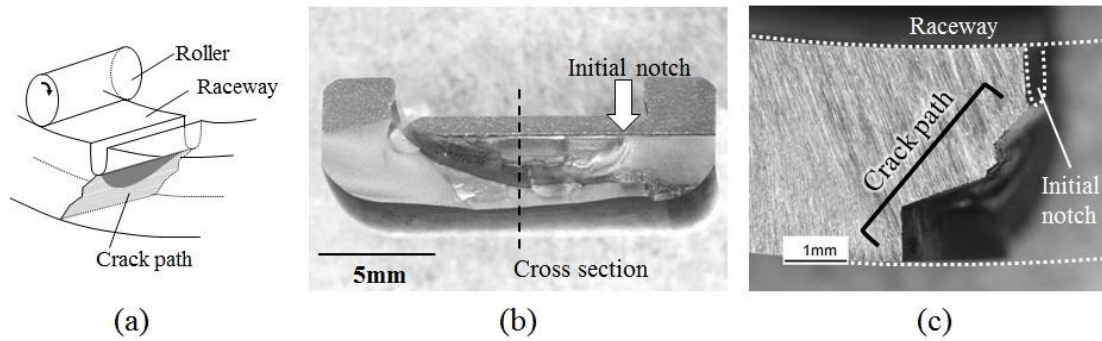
Fractured outer ring having Type B defect: (a) schematics of fracture surface, (b) picture of the fracture surface; (c) picture of the cross section.
